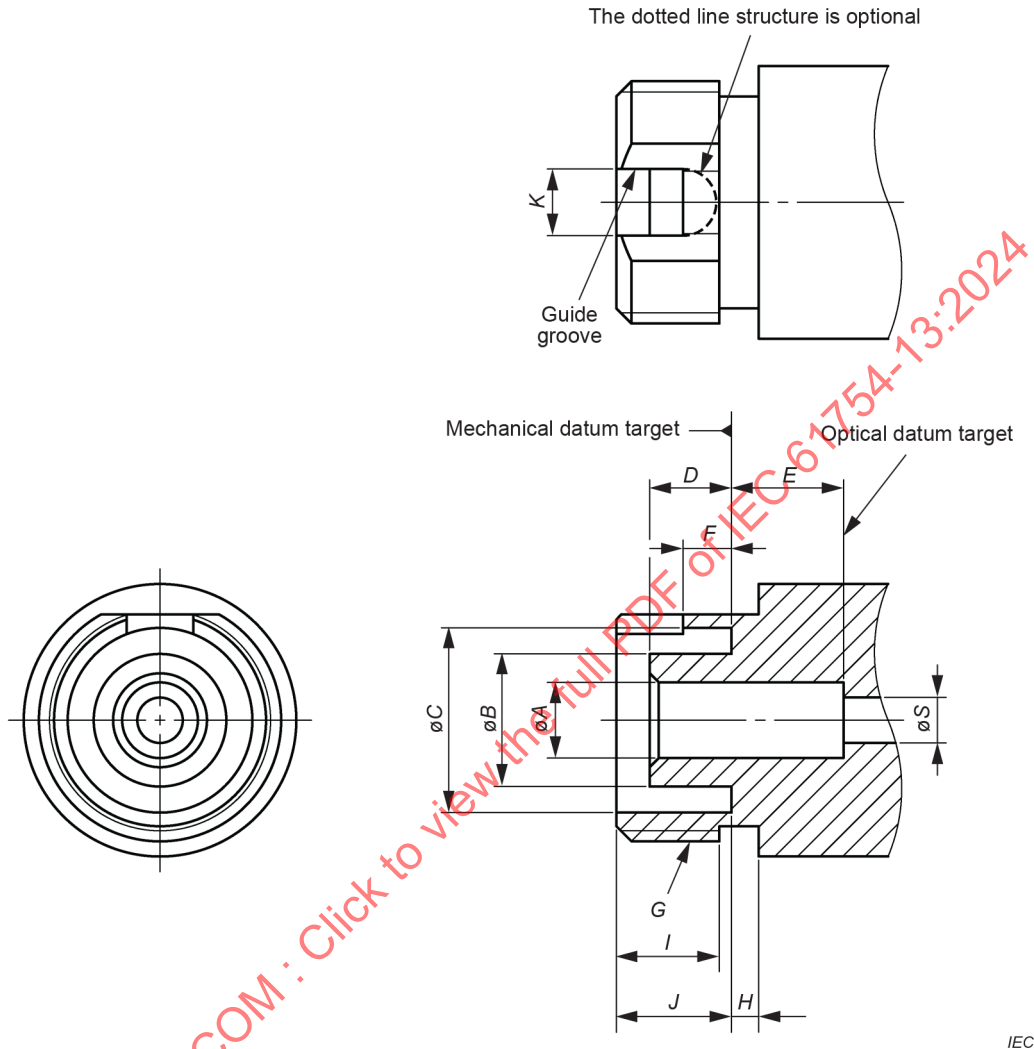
Pin gauge for adaptorTable 5 – Pin gauge dimensions*Dimensions in millimetres
